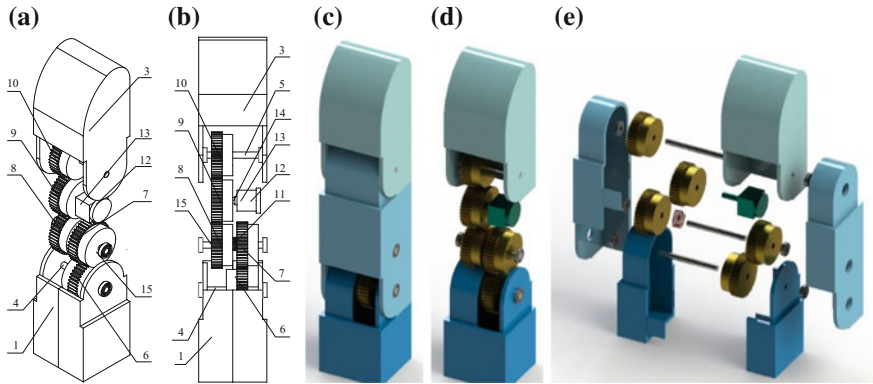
The structure of COSA-FBA finger. 1 base; 2 middle-phalange; 3 terminal-phalange; 4 first axis; 5 second axis; 6 first gear; 7 second gear; 8 third gear; 9 active gear; 10 fourth gear; 11 spring; 12 motor; 13 reducer; 14 driving mechanism; 15 transitional axis
